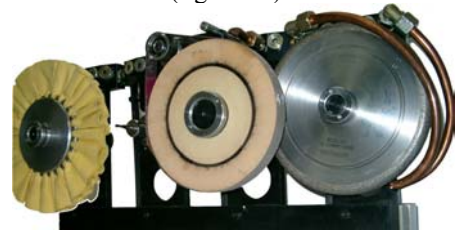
Magazine for automatic toolchange with grinding wheel, belting unit, buffing wheel and end mill
